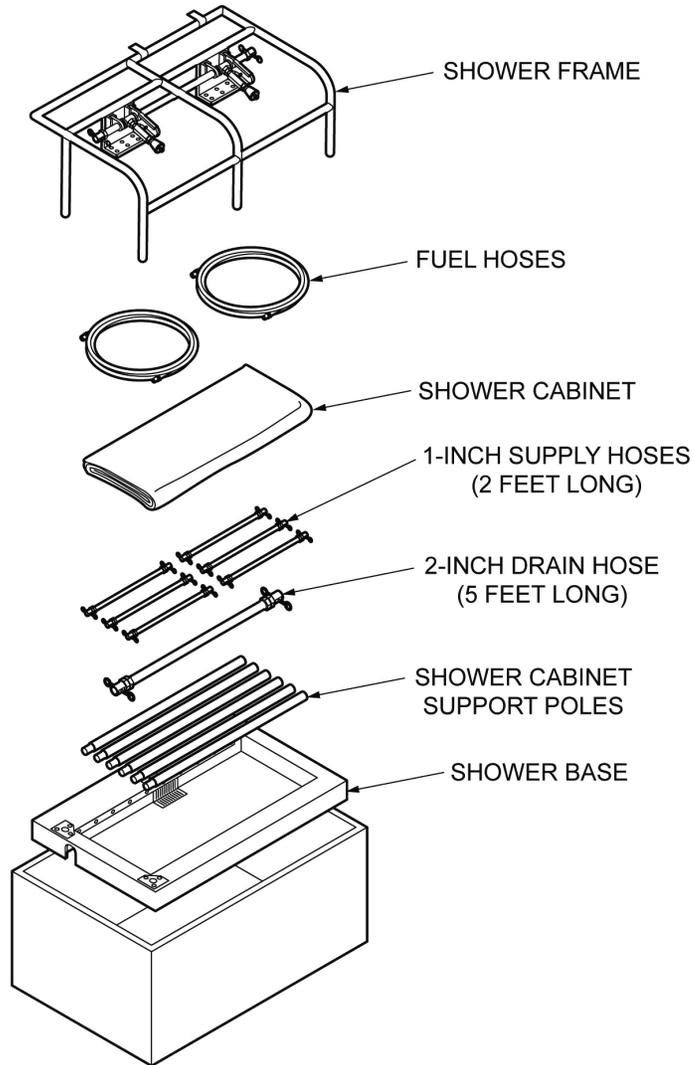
Packing the 12-Head Shower (Sheet 6 of 6).
